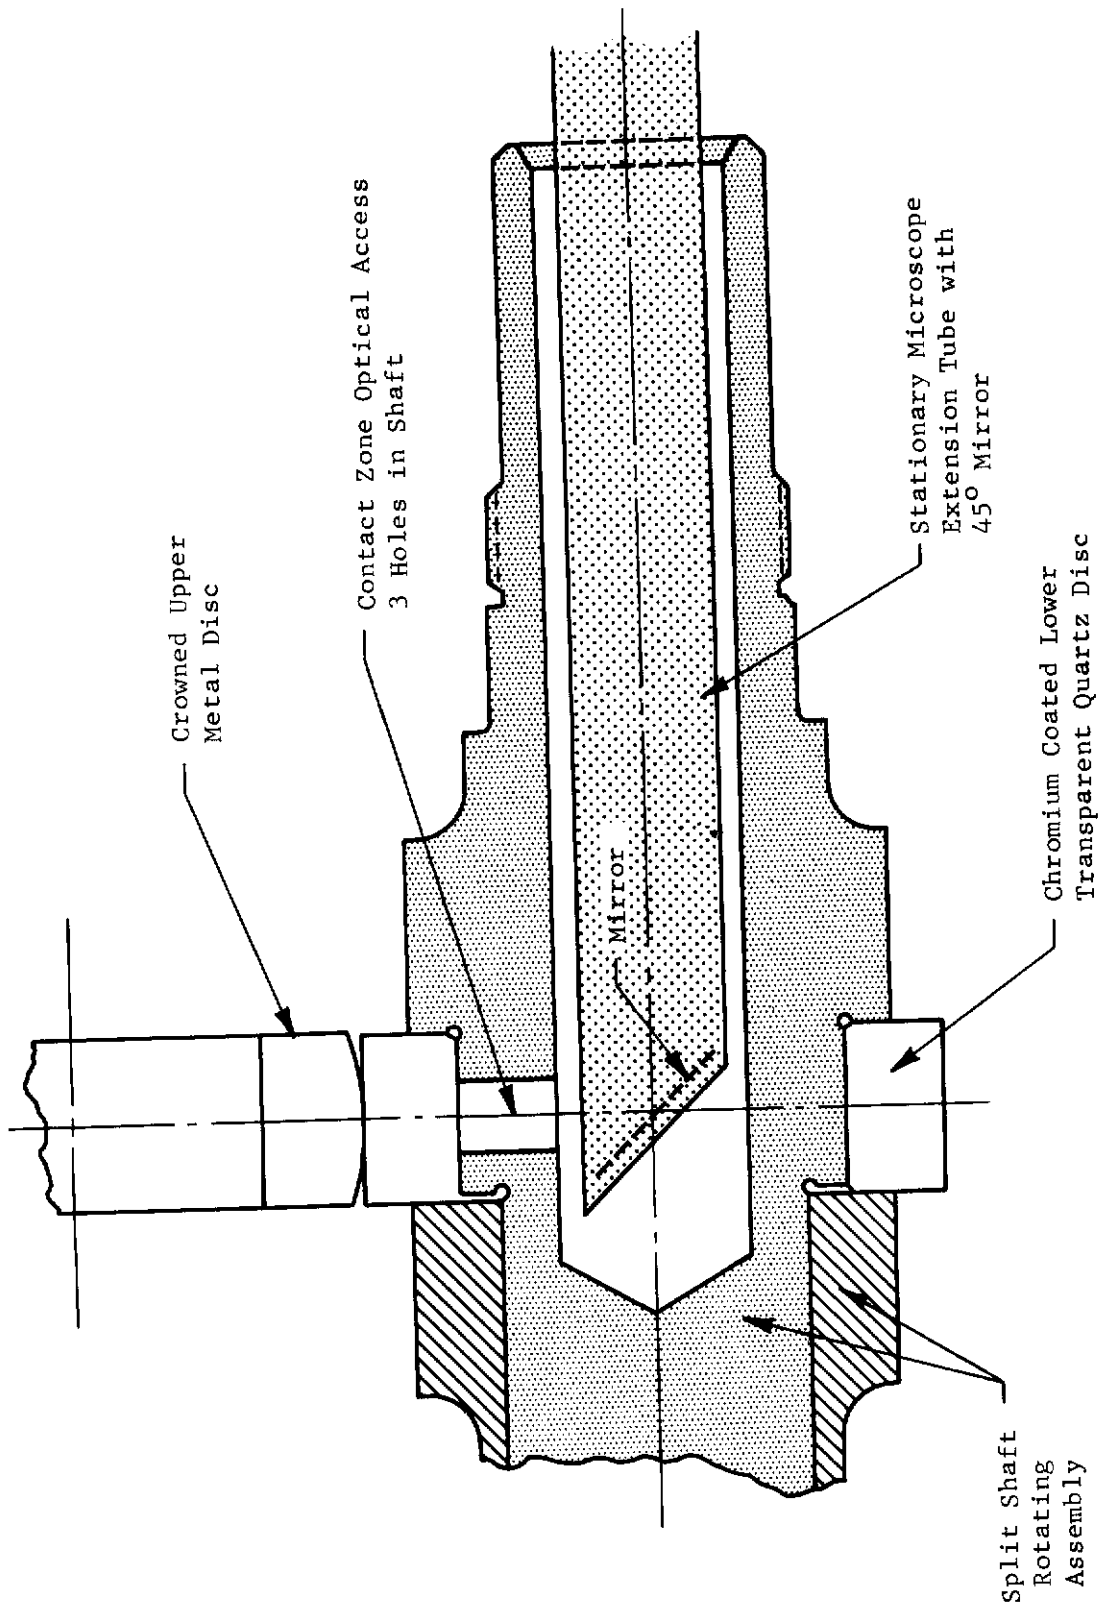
Lower Disc Specimen Shaft Showing Mounting Arrangement and Optical Access
